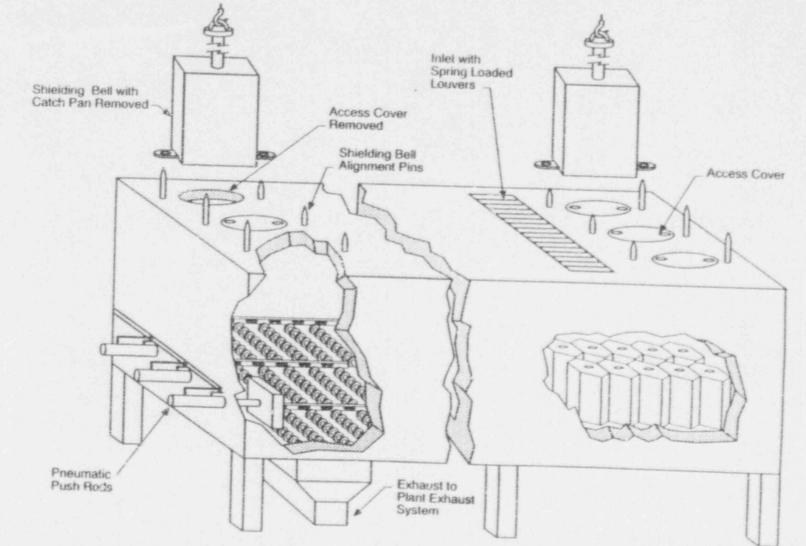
Block Dryer Arrangement (Loading/Unloading)
